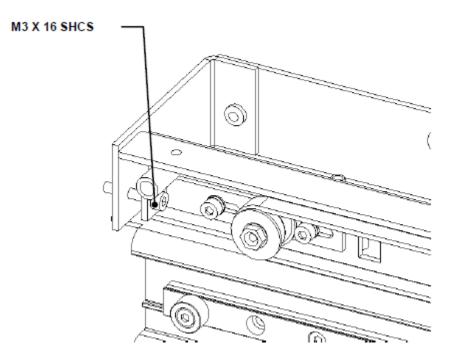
Screw between Y Idler Adjusting Plate and the Belt Tensioning Fixture
